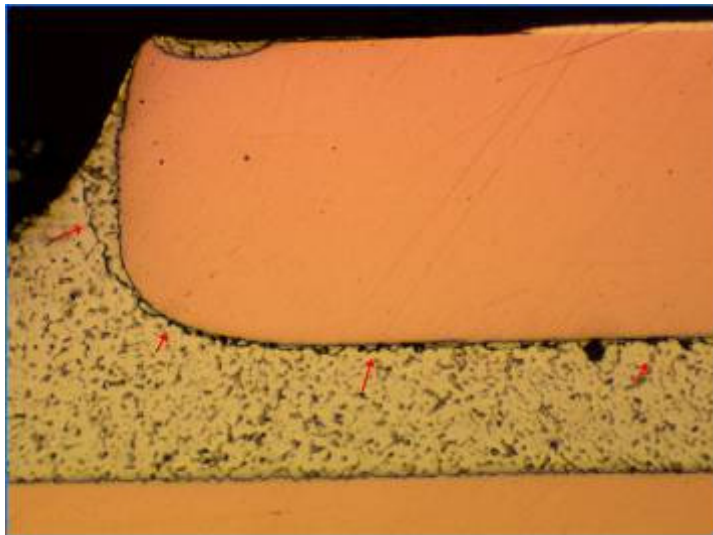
cross section, SN65, U54, left lead solder crack, 200x a
